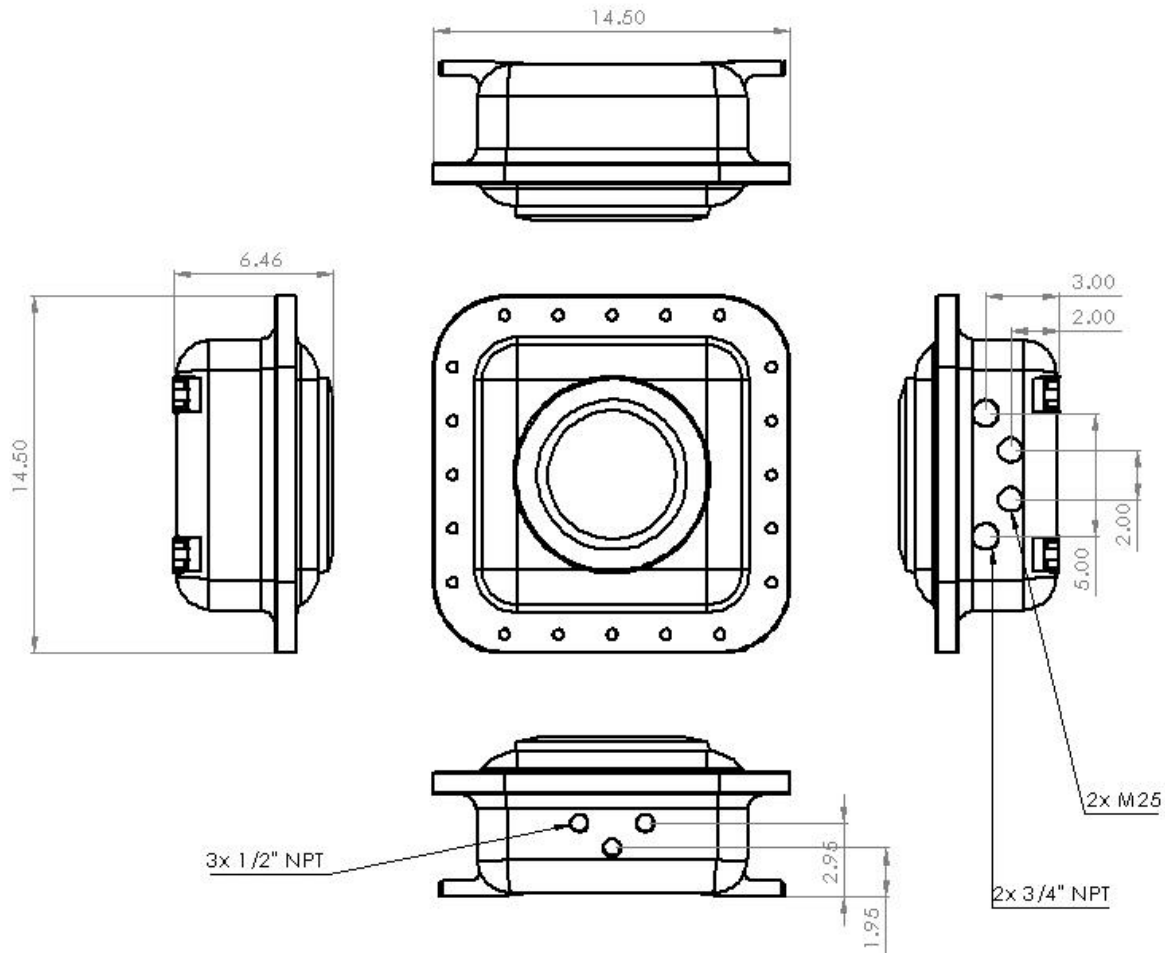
A.1)- The analyzer box drawing (dimensions in inches)
